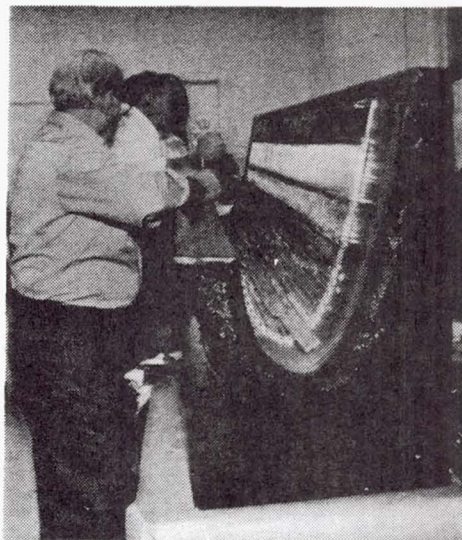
Leading-edge tool and part showing air duct and honeycomb core installation
